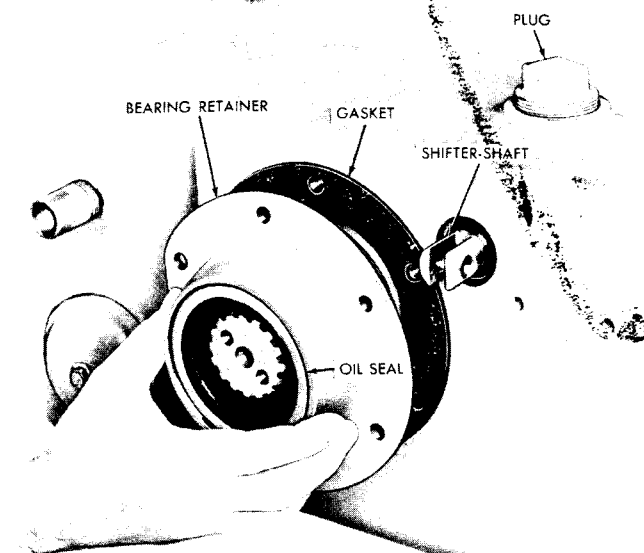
Installing front-output shaft bearing retainer S2442
